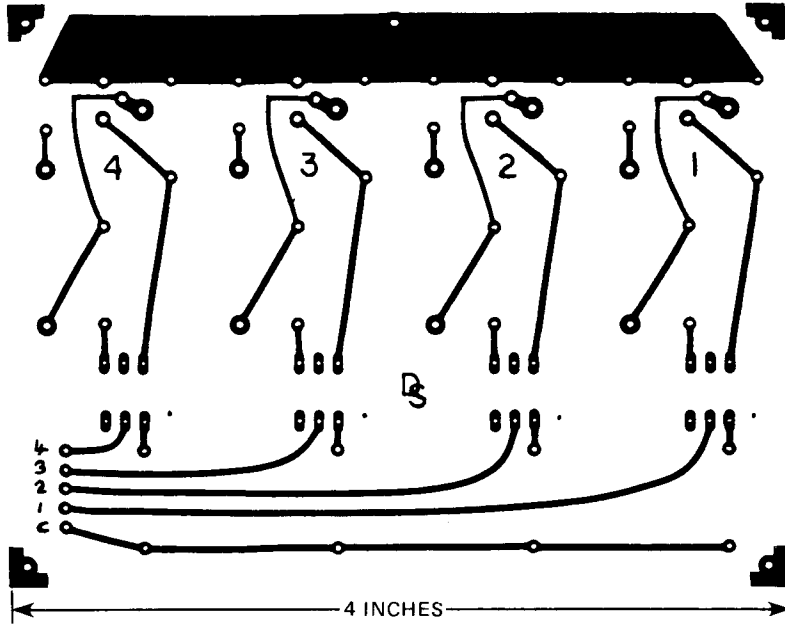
POWER-SWITCHING UNIT is constructed on single-sided PC board.
